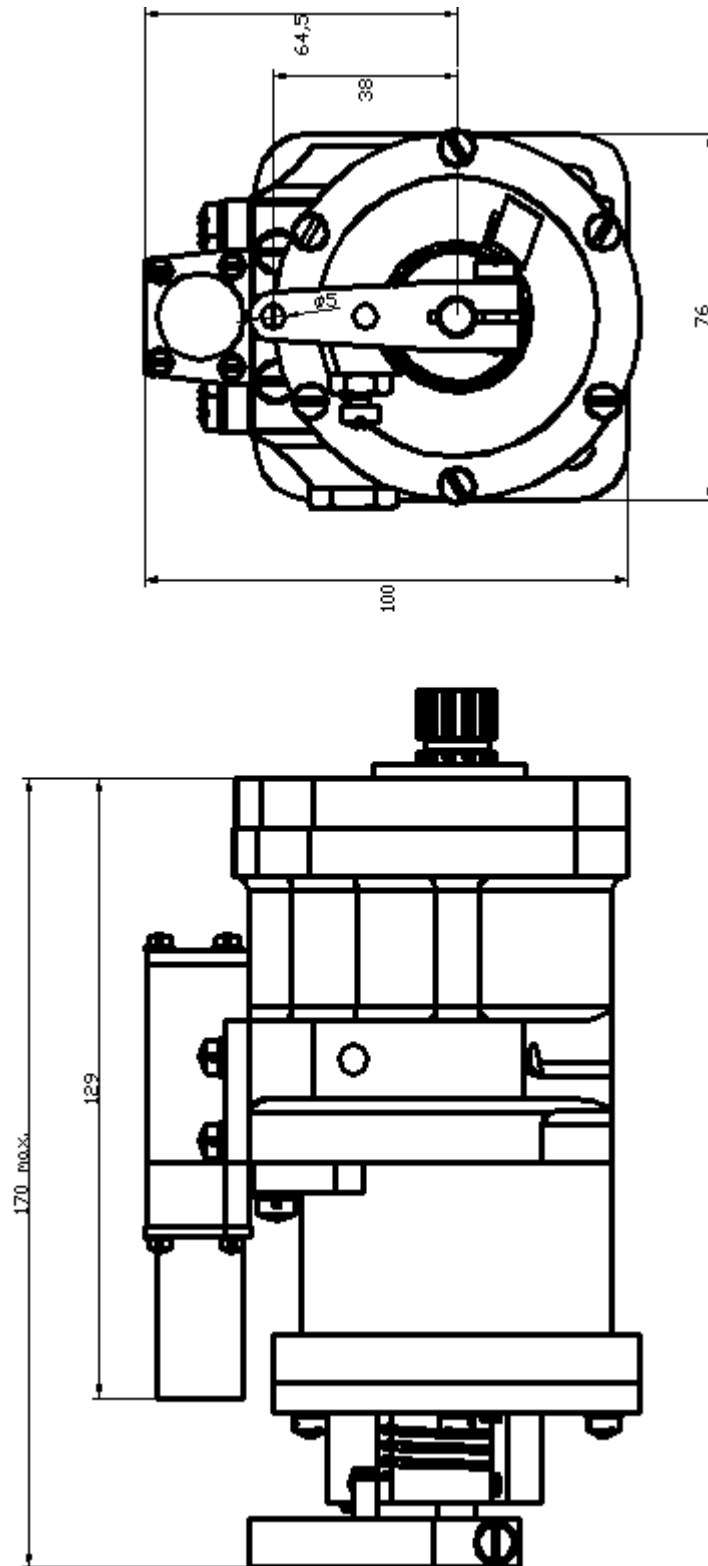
P-9(X)(-)(-) Propeller Governor (dimensions)
